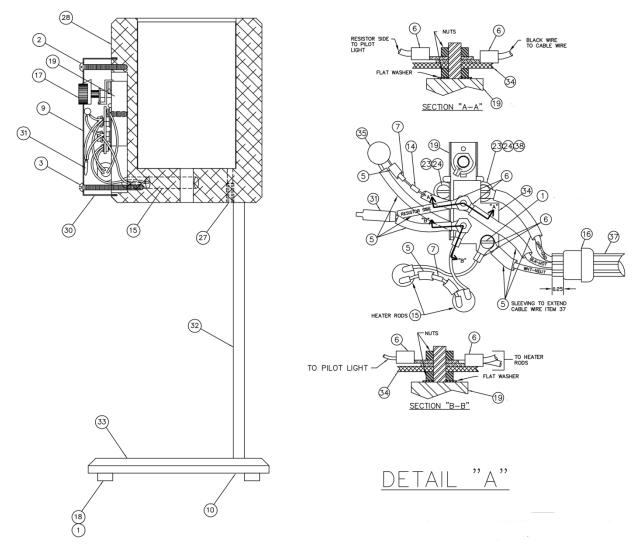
Heating Jacket Assembly, 230 V, 175 ml
